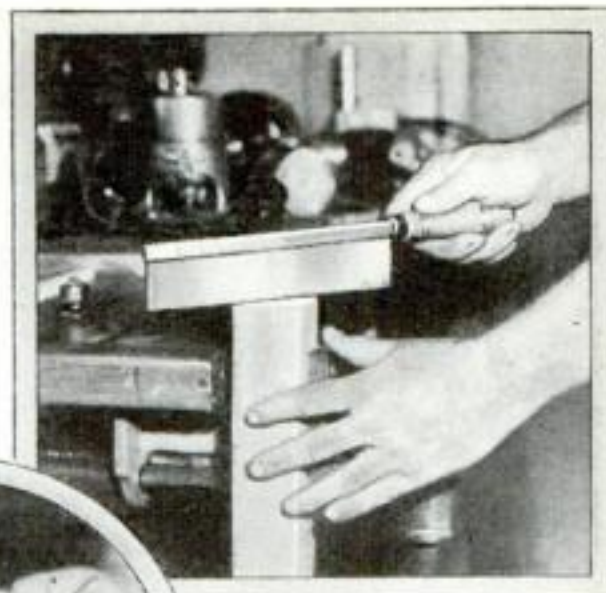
Using a dovetail saw to cut kerfs for centering.
